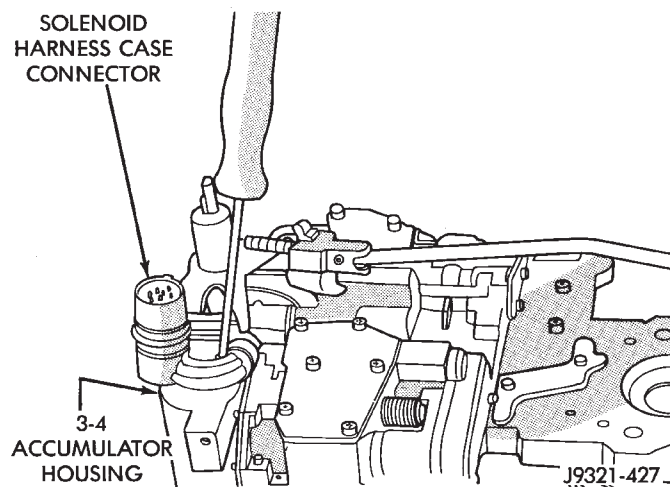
Removing/Installing Solenoid Harness Case Connector Shoulder Bolt
